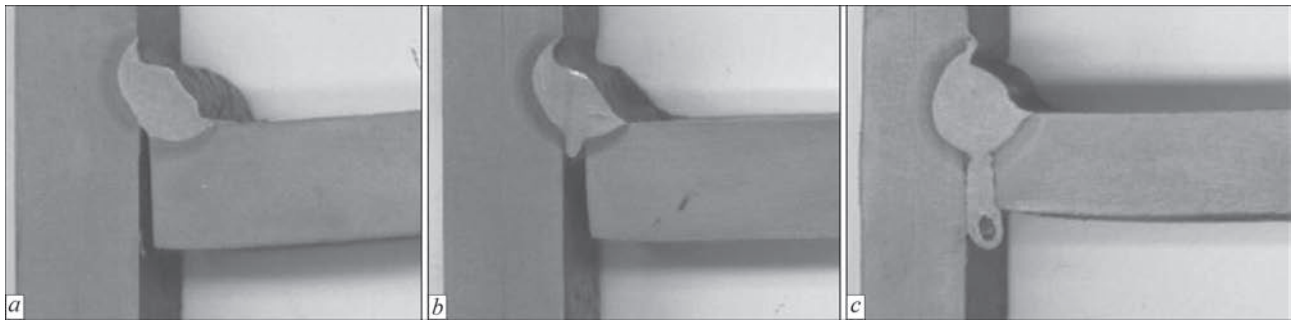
Examples of welded joints of specimens with different parameters of assembly and welding
